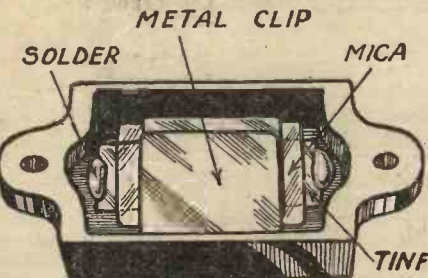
The inside of a fixed condenser, with the wax filling removed.
